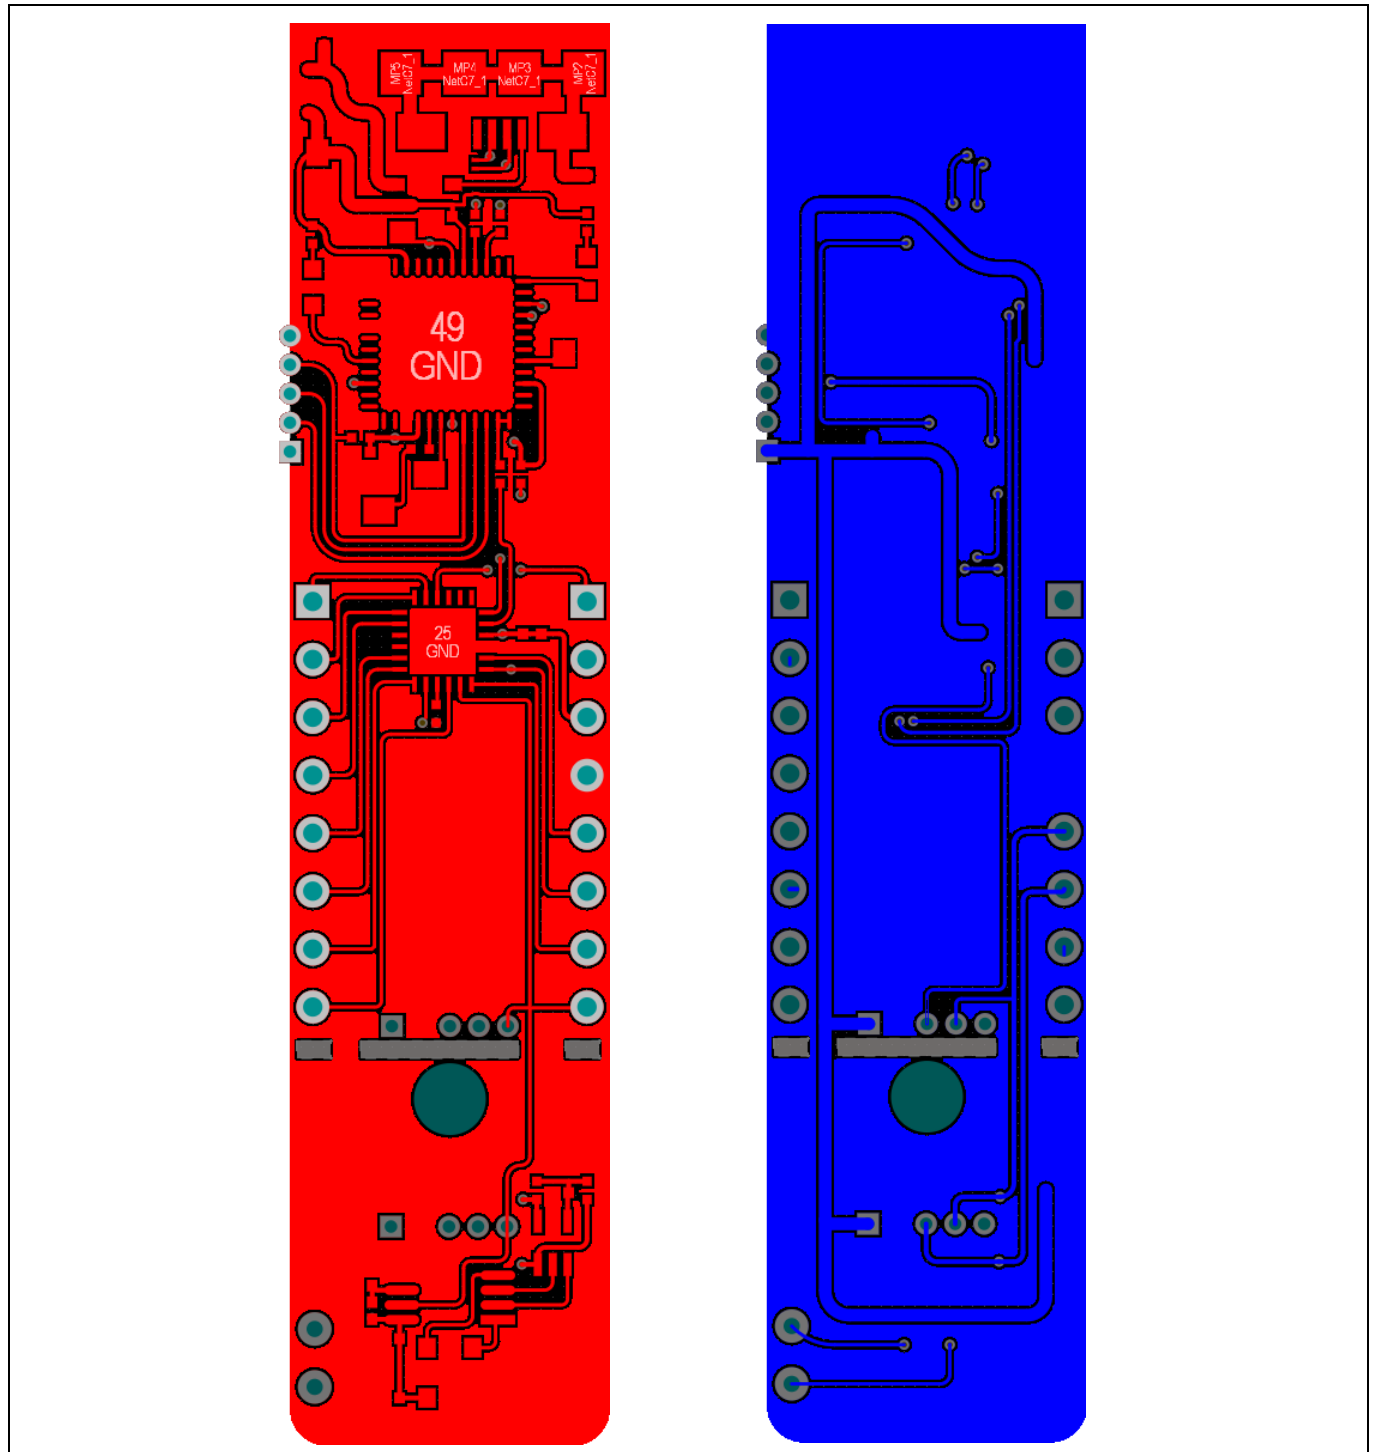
TLI55910 2Go evaluation kit PCB layout – Top (left), bottom (right)
